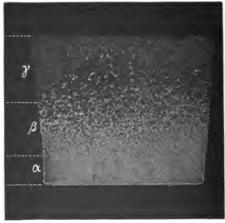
Chilled casting. (Actual size.) α layer is white iron.
